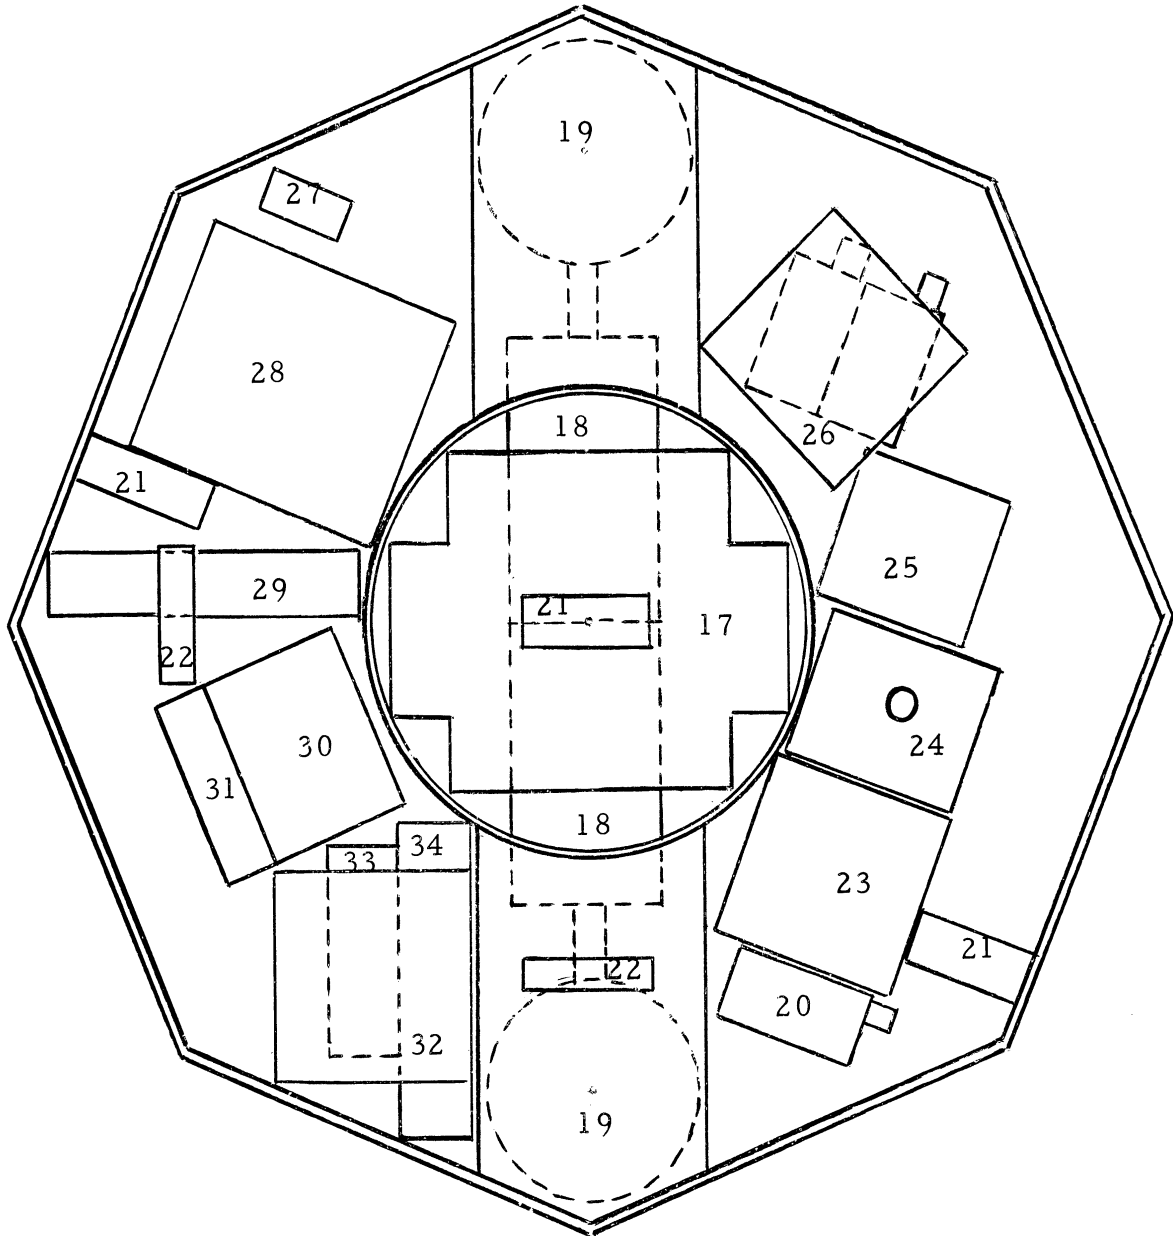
MOUNTING PLATFORM BOTTOM VIEW
